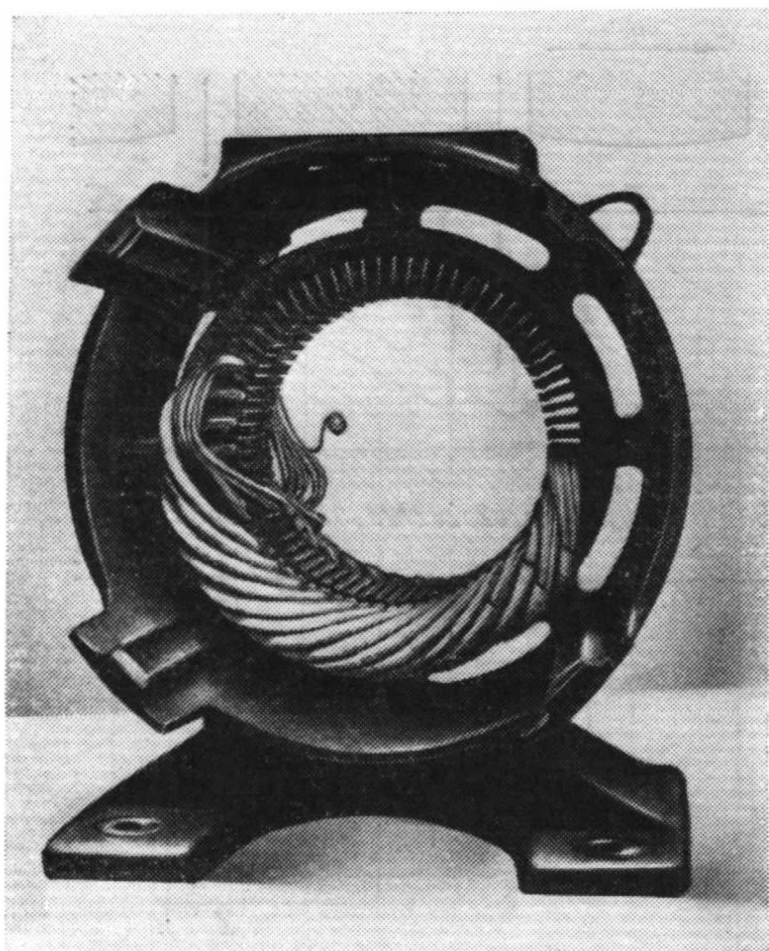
Stator of an induction motor partly wound with a chain winding
